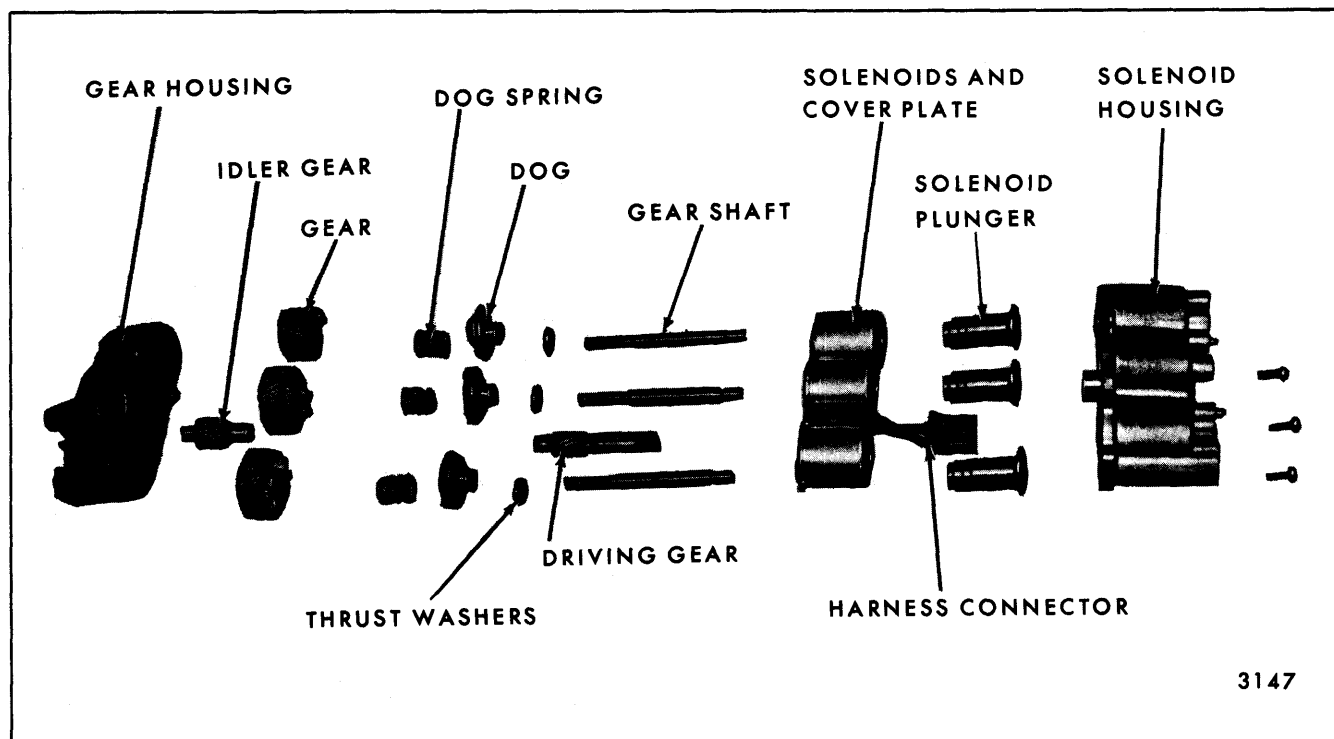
Six-Way Seat Adjuster Transmission - Disassembled - Buick, Oldsmobile and Cadillac 60-40 Seats
